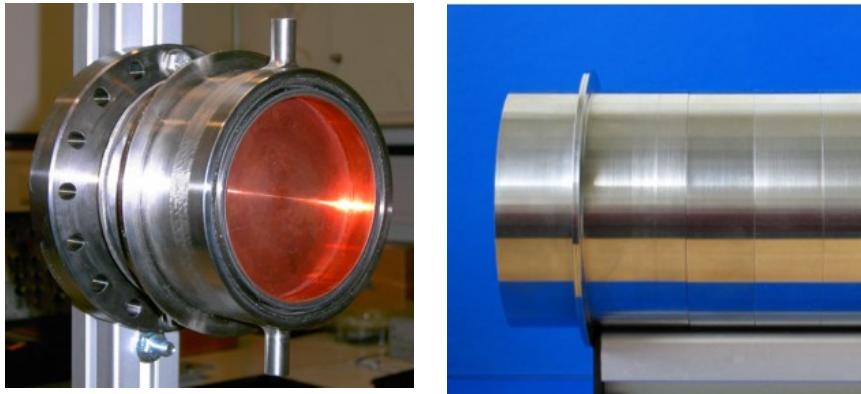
The dummy window structure fabricated for tests of automated cutting (left) of automated welding (right).
